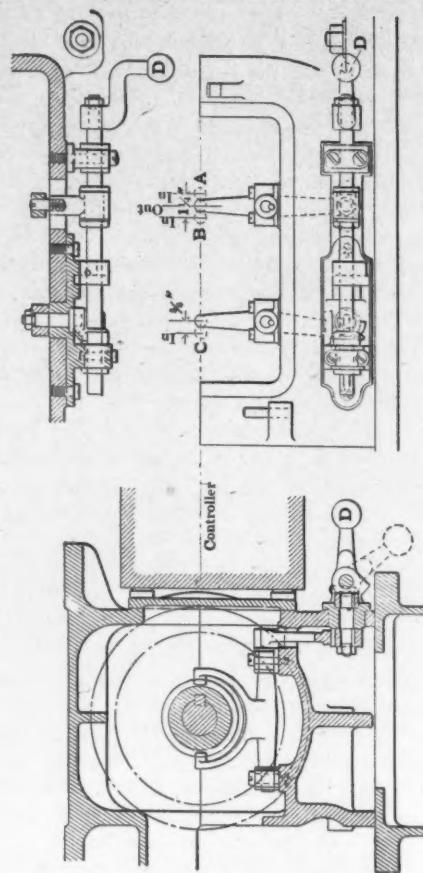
ARRANGEMENT FOR THROWING CLUTCHES.
